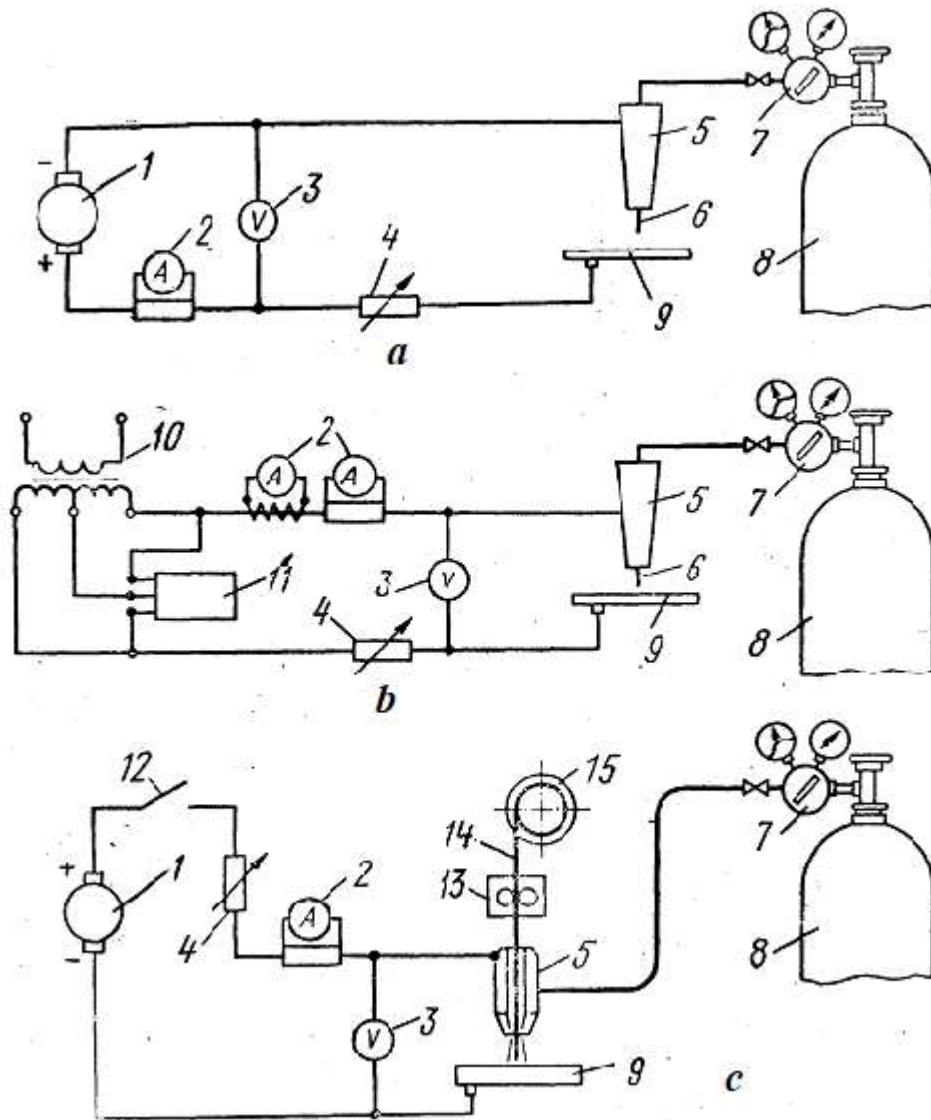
Electric and gas welding scheme in protective gases:
